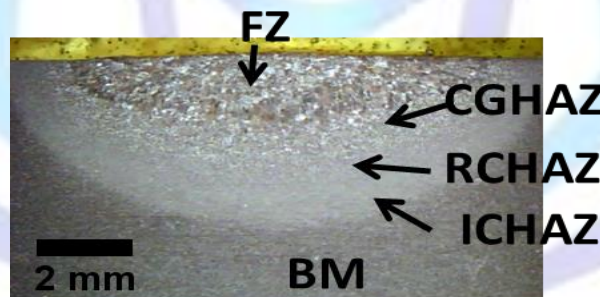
Macrostructure of the welding zone of the F steel
